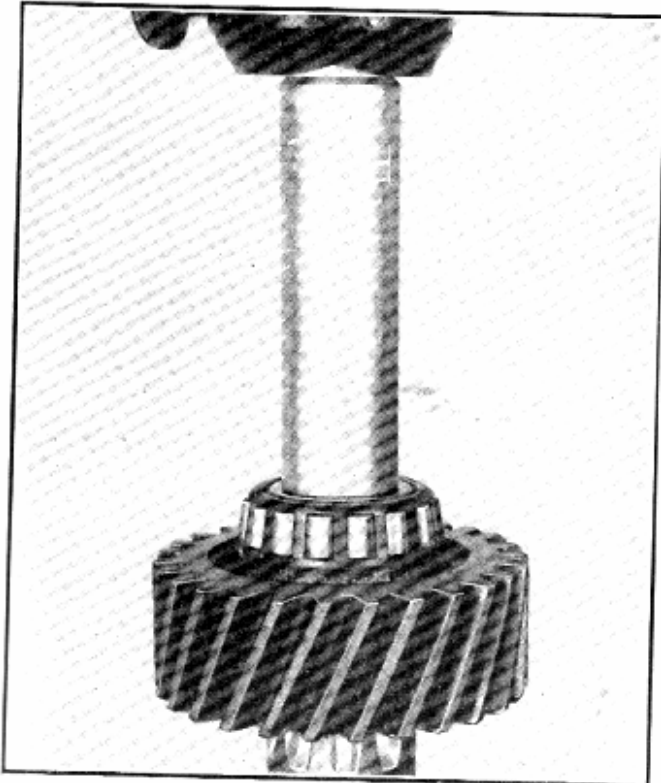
Installing Driven Shaft Bearing, Tool No. J-1718
